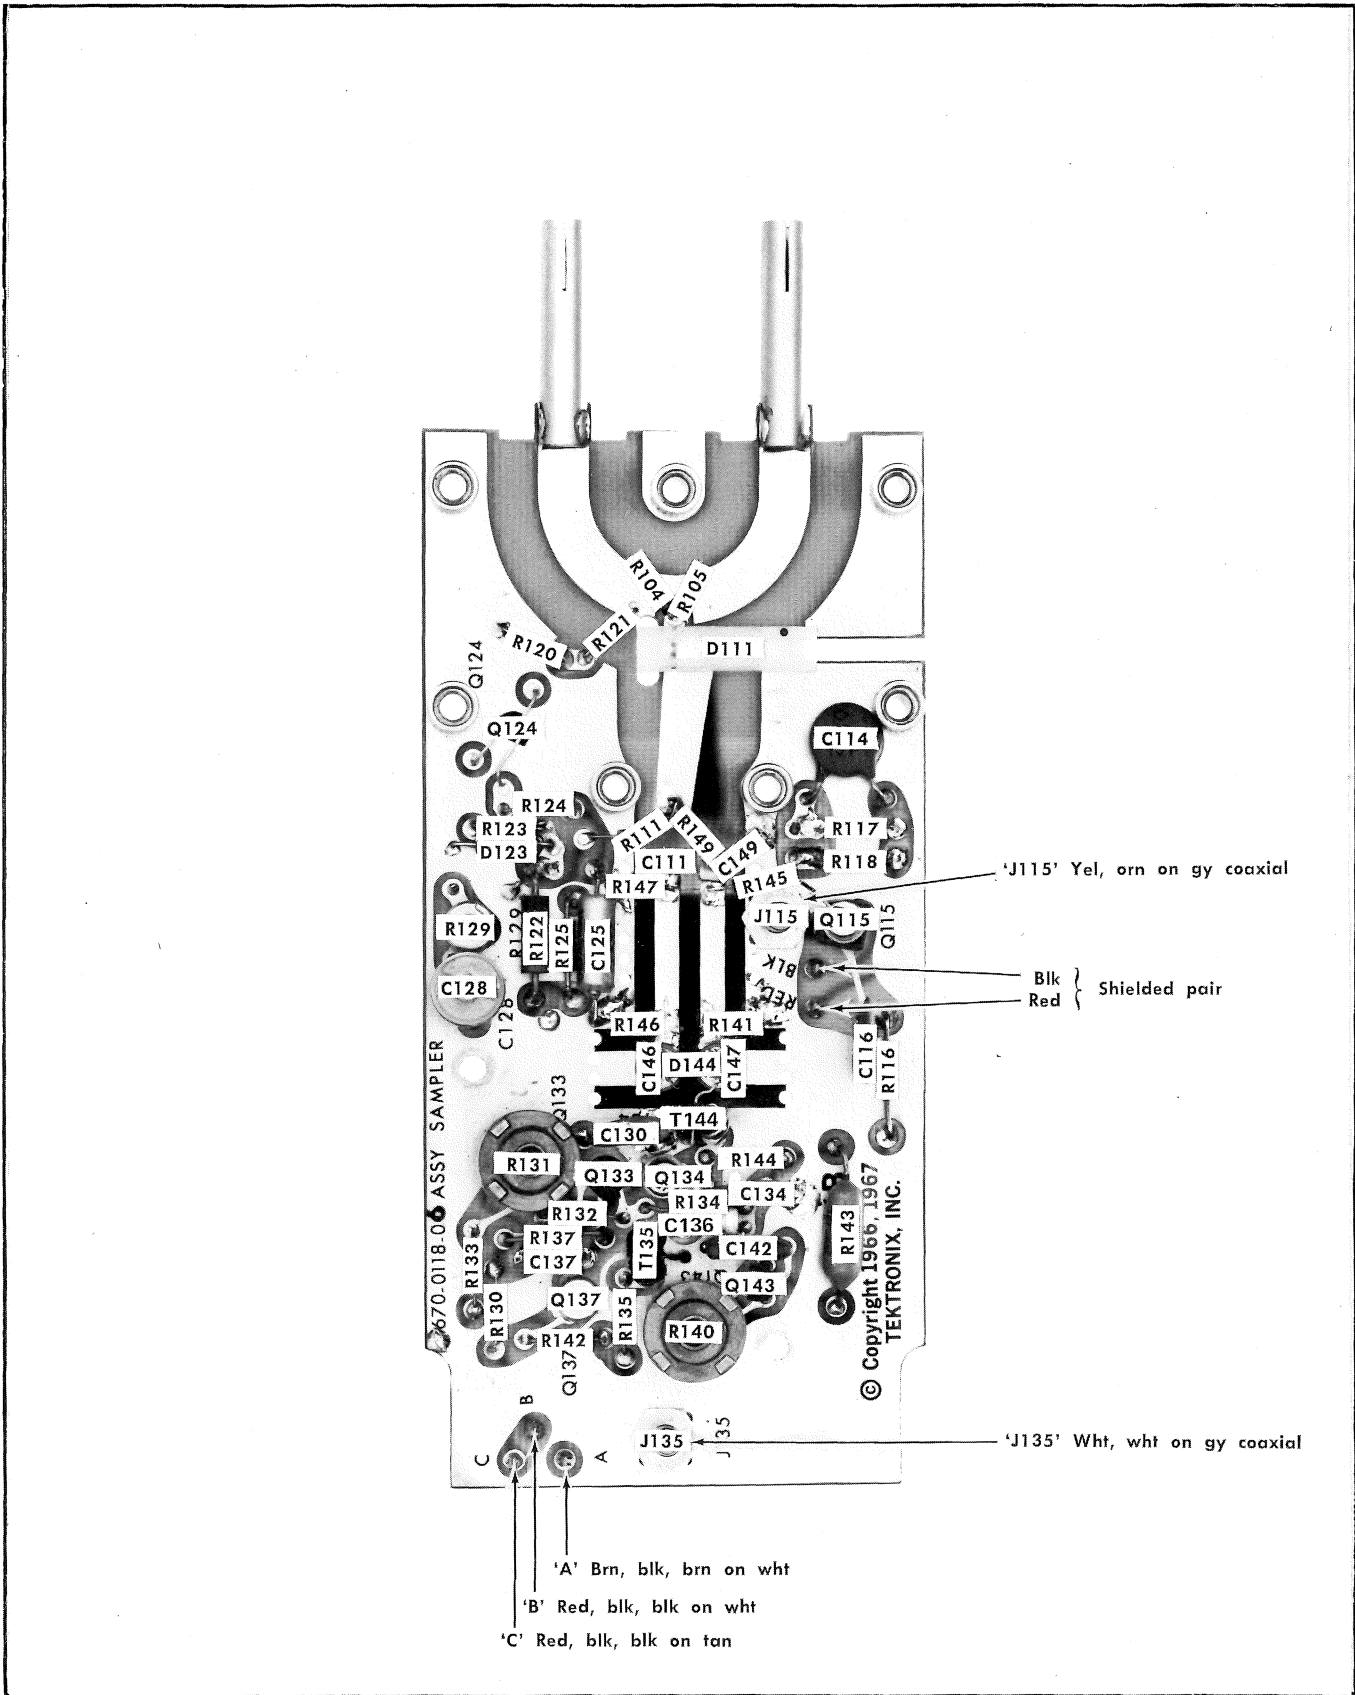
A. Sampler circuit board assembly (front) for SN 3000 and up.
